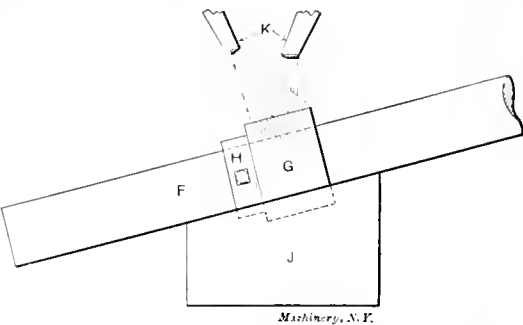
Arrangement of Cooling Tank when Shrinking Collars on Shafts.
